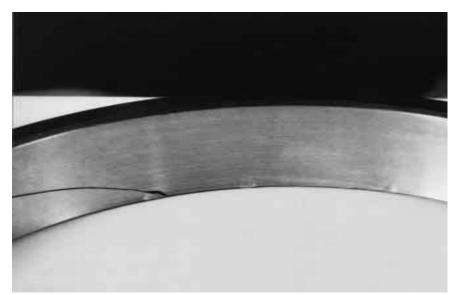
Fractured outer ring of a self-aligning ball bearing.
